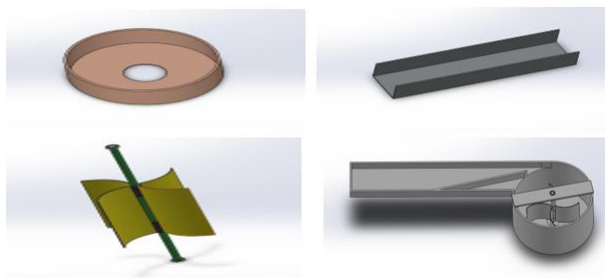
CAD modeling of basin, channel, blades connected to shaft and final geometry.
